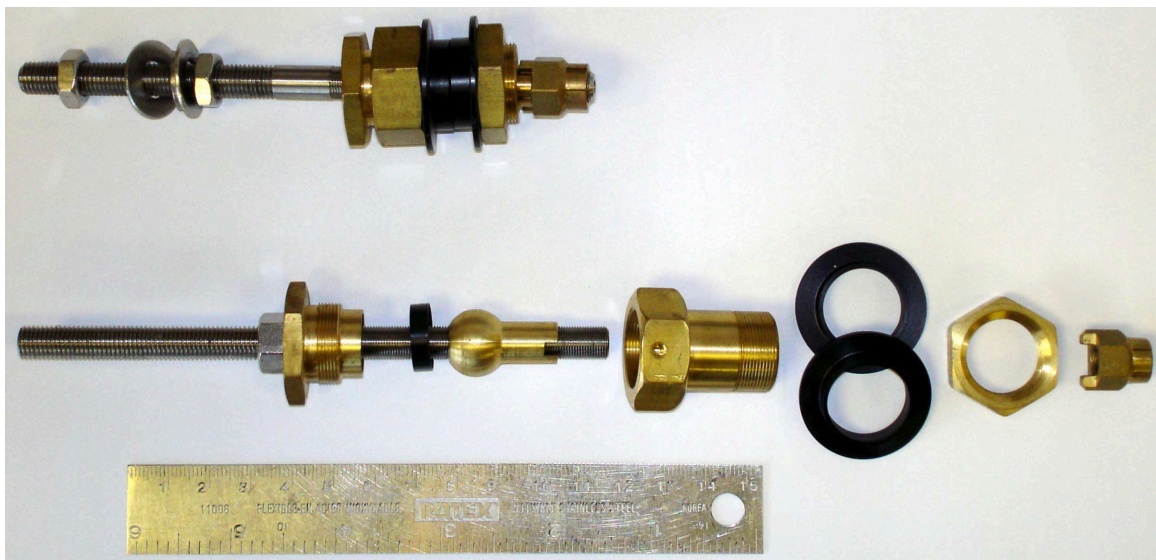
Assembled and exploded views of a gimbal assembly. The mirrors are gently squeezed between the two black rings on each gimbal. The alignment is adjusted by turning the front nuts, which makes the gimbal assembly slide up and down the threaded rod.
